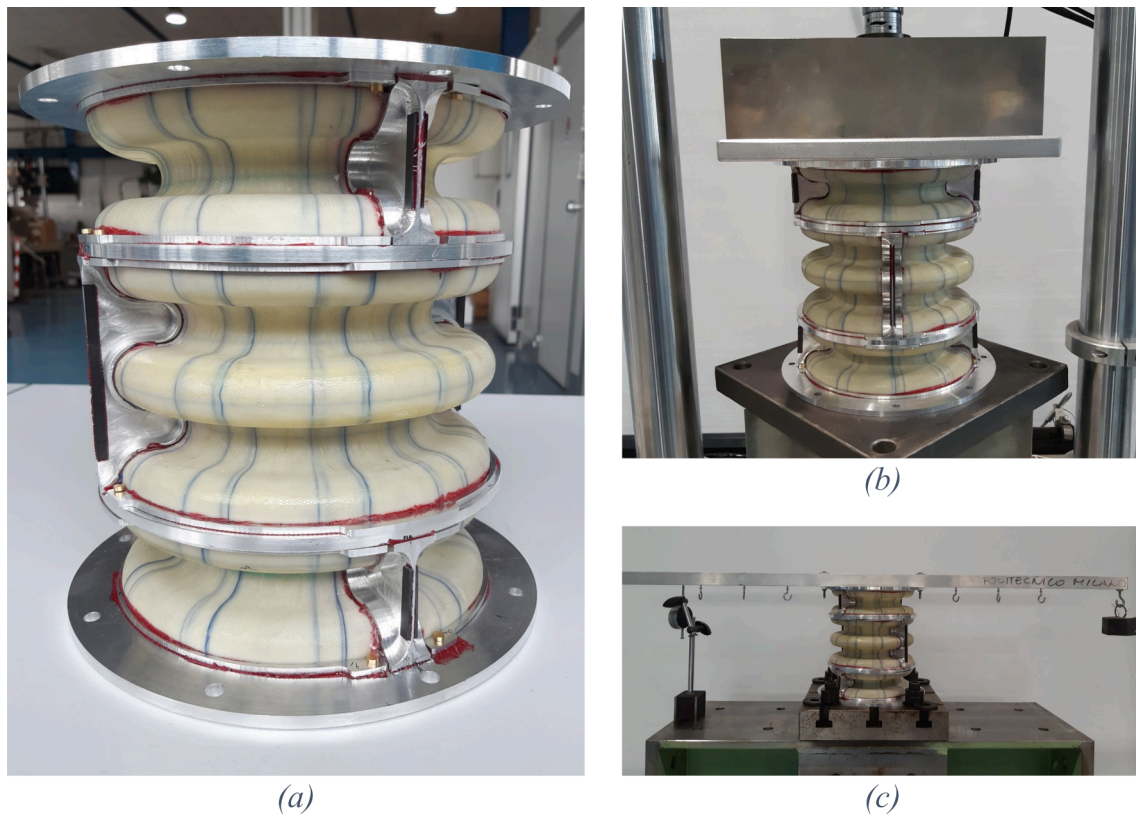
(a) Complete assembly; (b) Joint in compression test; (c) Joint in bending test.
